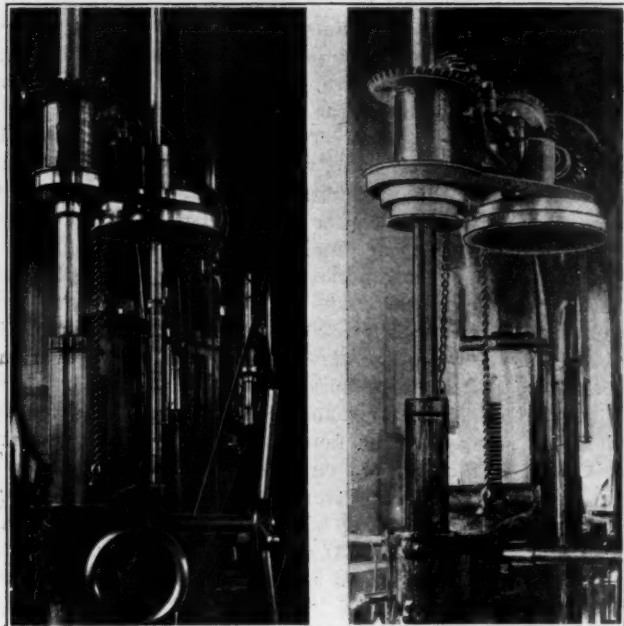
A.—FEED CONE PULLEY FOR DRILL PRESS, SHOWING INCREASE.
